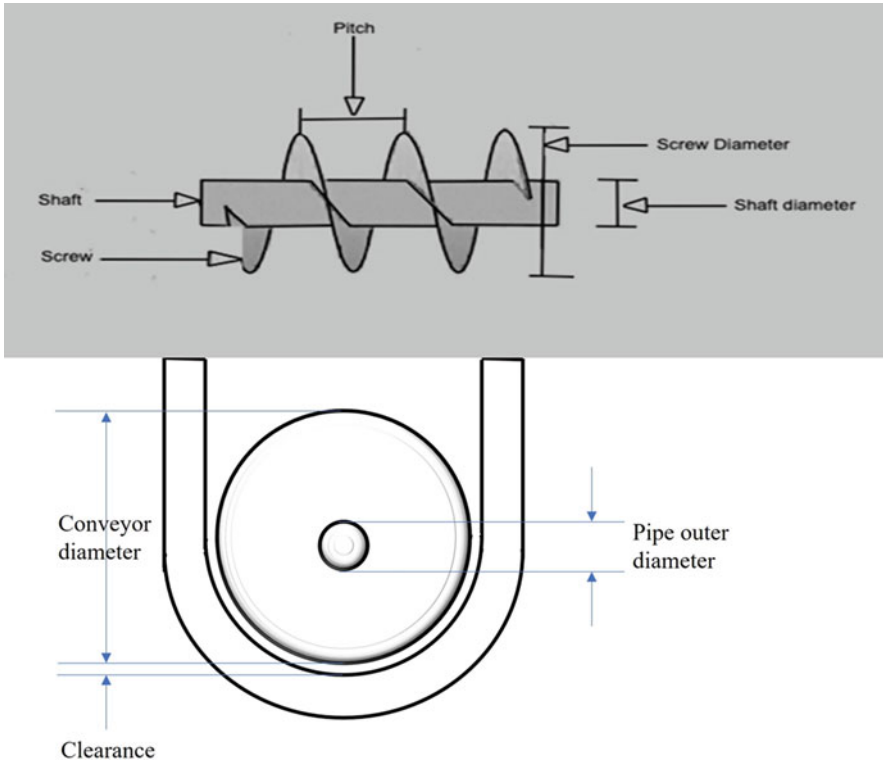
(a) Screw Conveyor Shaft. (b) Screw Conveyor side view
